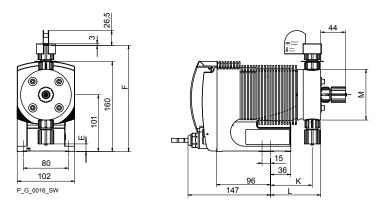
Dimensional drawing gamma/ L, material version PPE, PPB, NPE, NPB SEK - dimensions in mm
